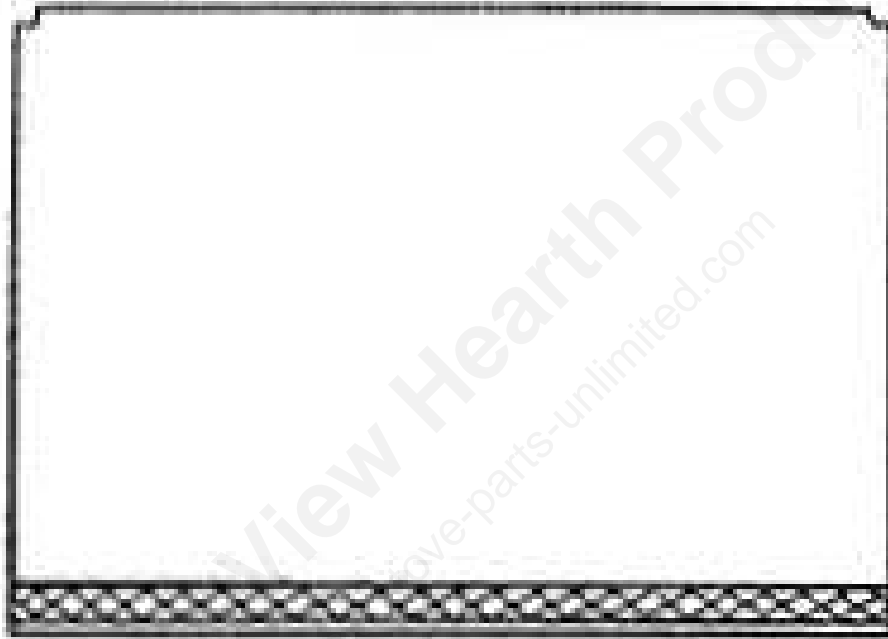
BACK PLATE, OUTSIDE VIEW
